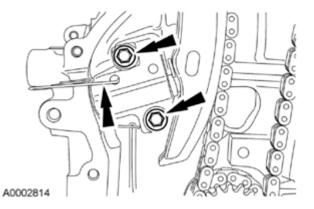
Locating Timing Chain Tensioner And Bolts Courtesy of FORD MOTOR CO.
